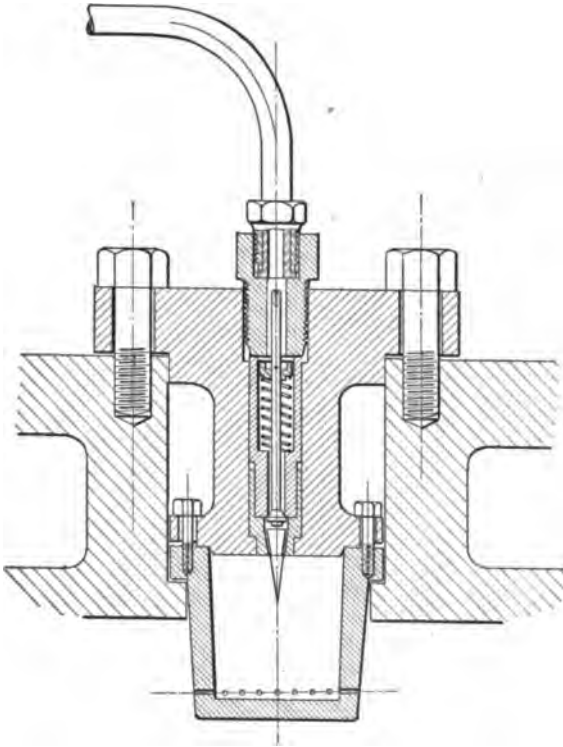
Nordberg ignition device on semi-Diesel engine, late design.
